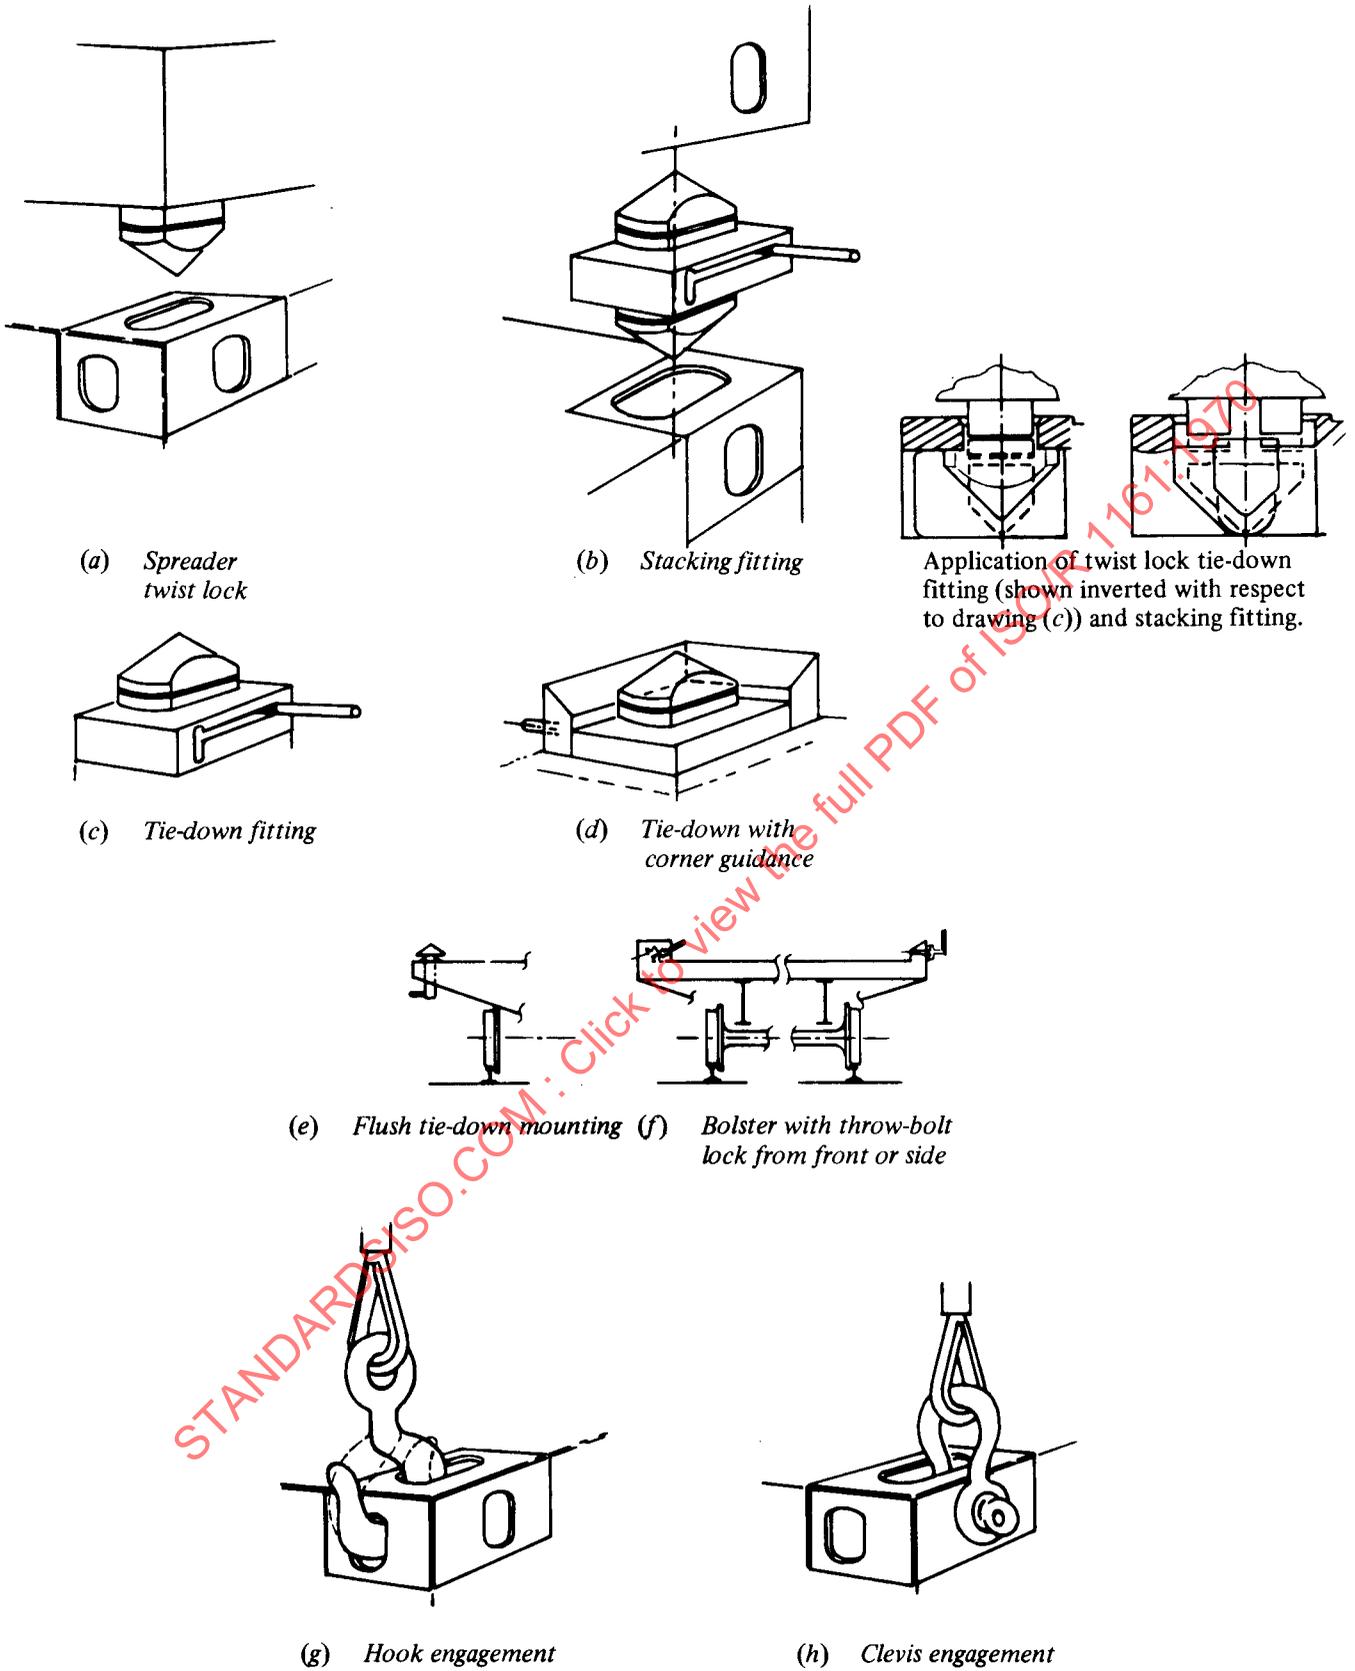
Examples of corner fitting engaging, lifting and securing devices
